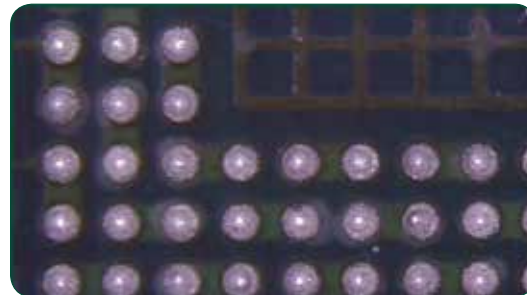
Bottom view of 0.5mm pitch BGA package after dipping in PoP Paste Indium9.88-HF.
